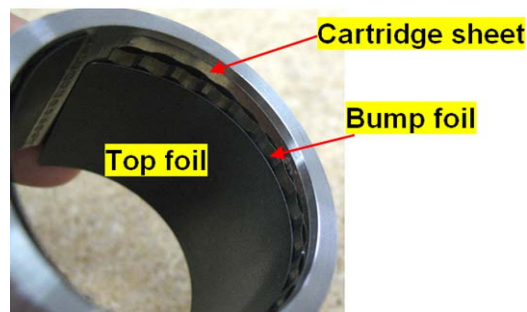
Top foil, bump foil strip and cartridge sheet in MiTi foil bearing. Taken from [4]
